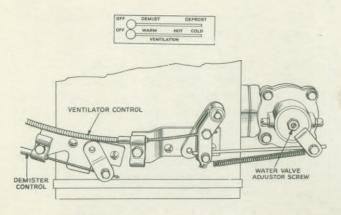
Showing Air and Demister valves closed and water valve fully open
